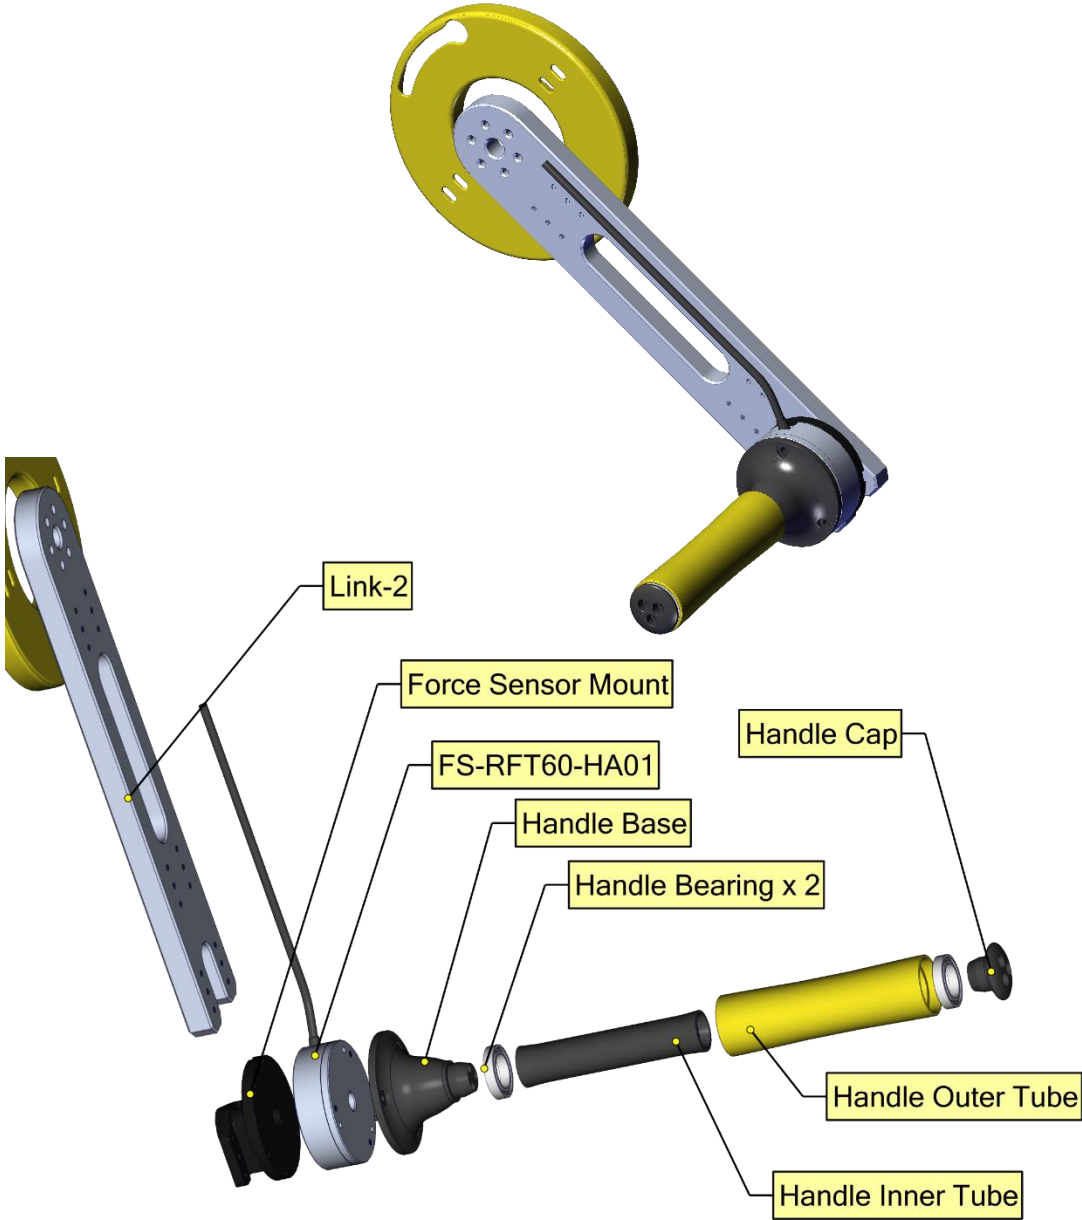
Link 2 assembly (Top), Exploded view of End-effector (Bottom)
